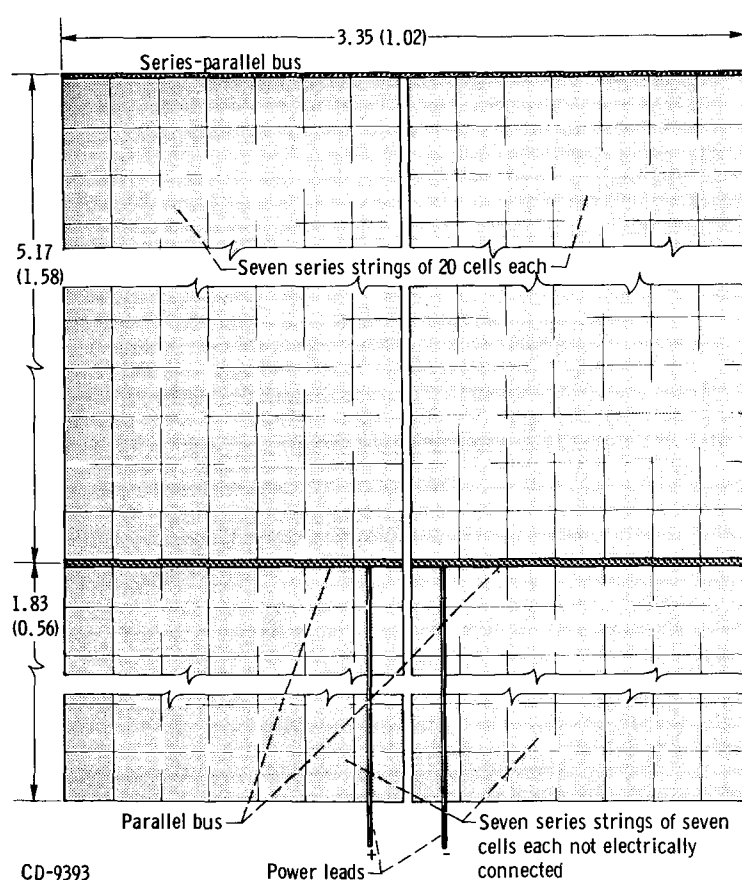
Electrical connections of array. (All dimensions in feet (m).)
